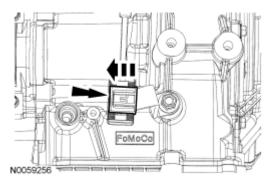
Sliding Release Tab Back To Lock Adjuster Courtesy of FORD MOTOR CO.
